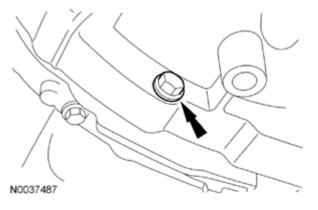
Locating Bellhousing-To-Oil Pan Bolt Courtesy of FORD MOTOR CO.
